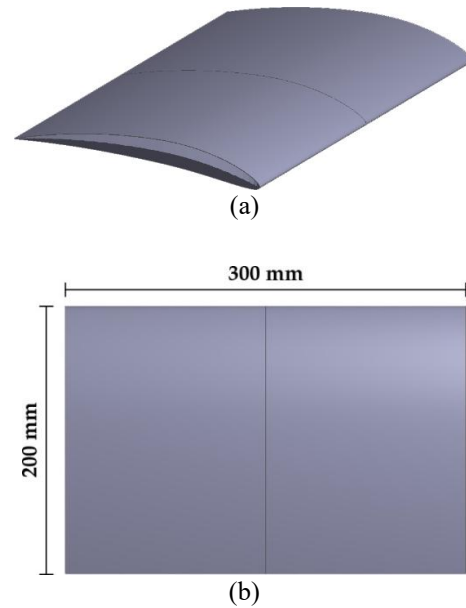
The wing model and its dimensions; a) isometric-view b) top-view.
